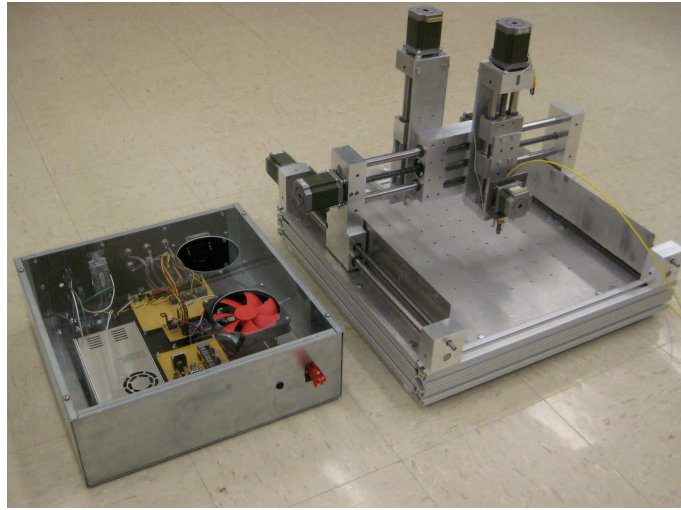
A picture of the Hydra combined CNC milling machine and 3D printer [52]
